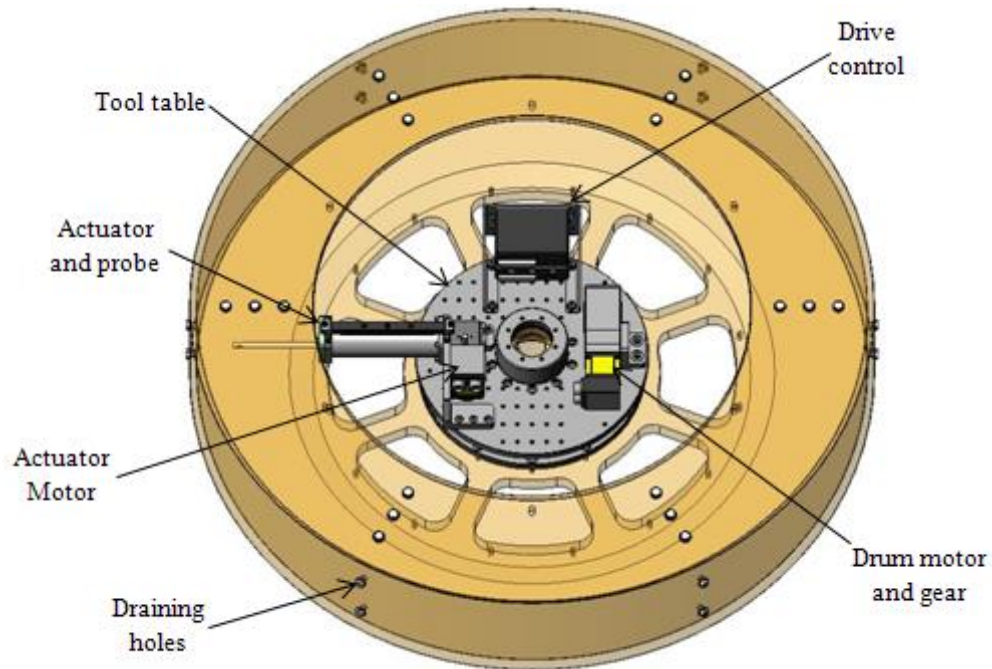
Cut-away of drum showing tool table, actuator and drive assembly (Broadbent & Sons 2010).
